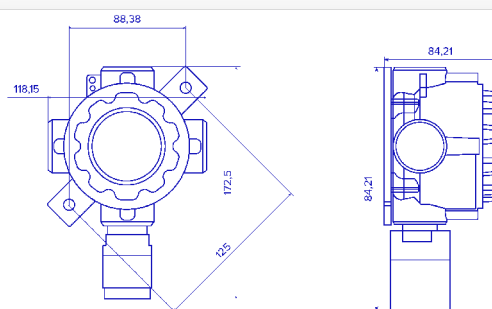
Housing appearance & overall dimensions (mm) — TRM-EX with electrochemical sensor
